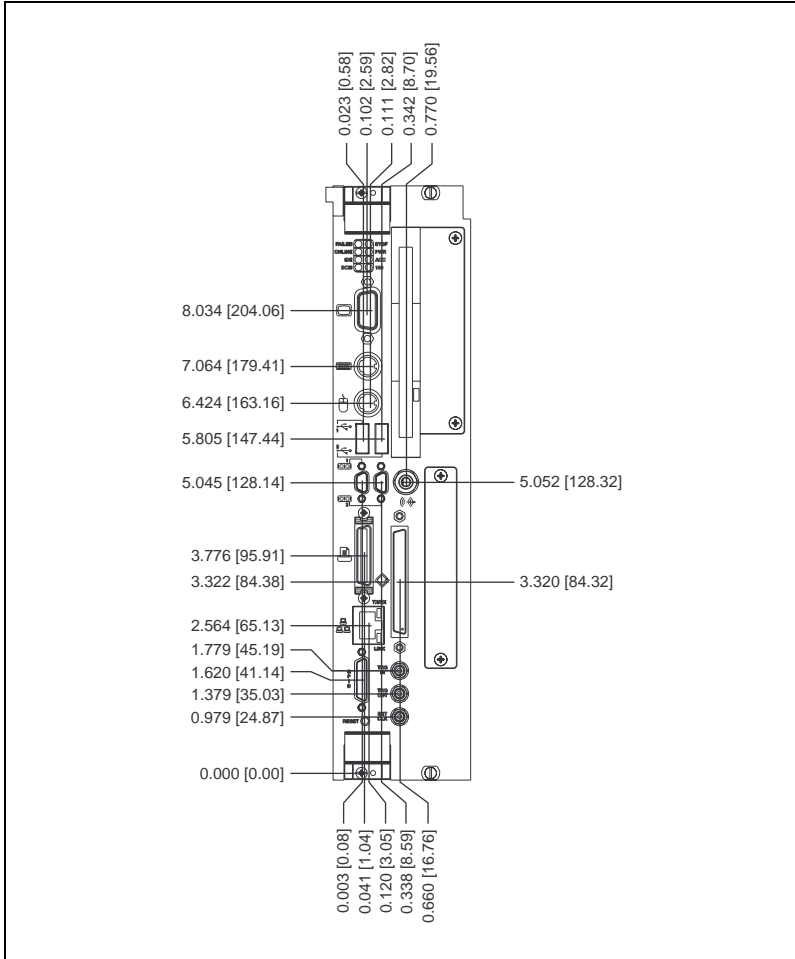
VXIpc-873 Front Panel Layout and Dimensions
